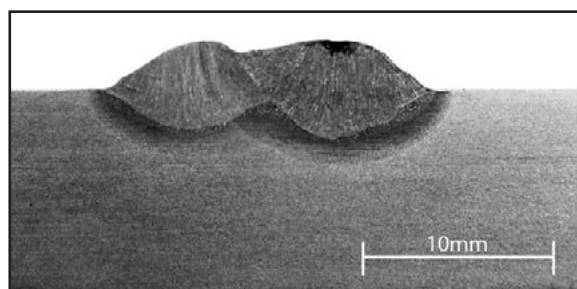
Cross-section of the test piece made of S420G2+M steel with the test overlay weld and the temper bead made using the local dry chamber method and a solid wire. Overlap 40%.
